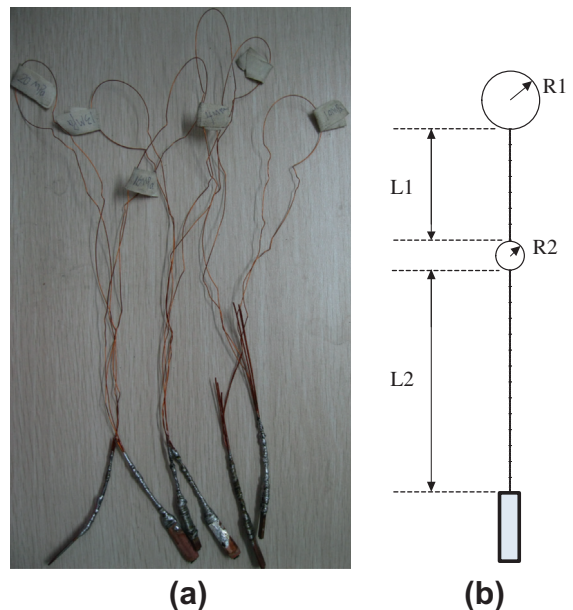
Persistent joints (a) fabricated with cold-pressing welding technology, and their dimensions (b), $L_1 = 50$ mm, $L_2 = 200$ mm, $R_1 = 18$ mm, $R_2 = 10$ mm.
